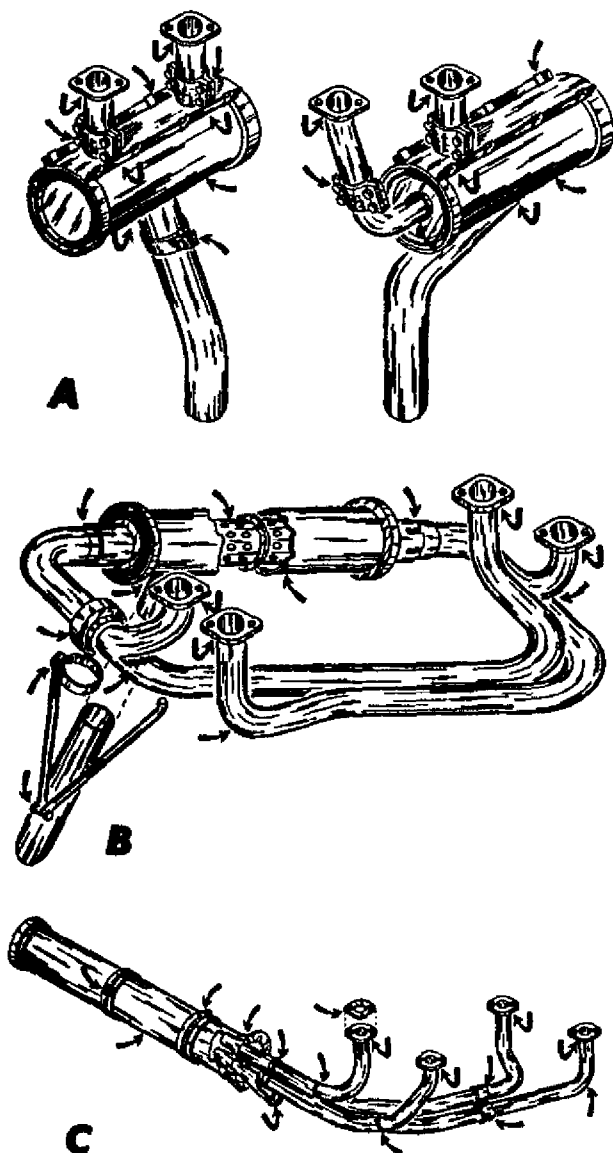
Primary inspection areas (A. Separate system; B. Crossover type system; C. Exhaust/augmentor system.)
